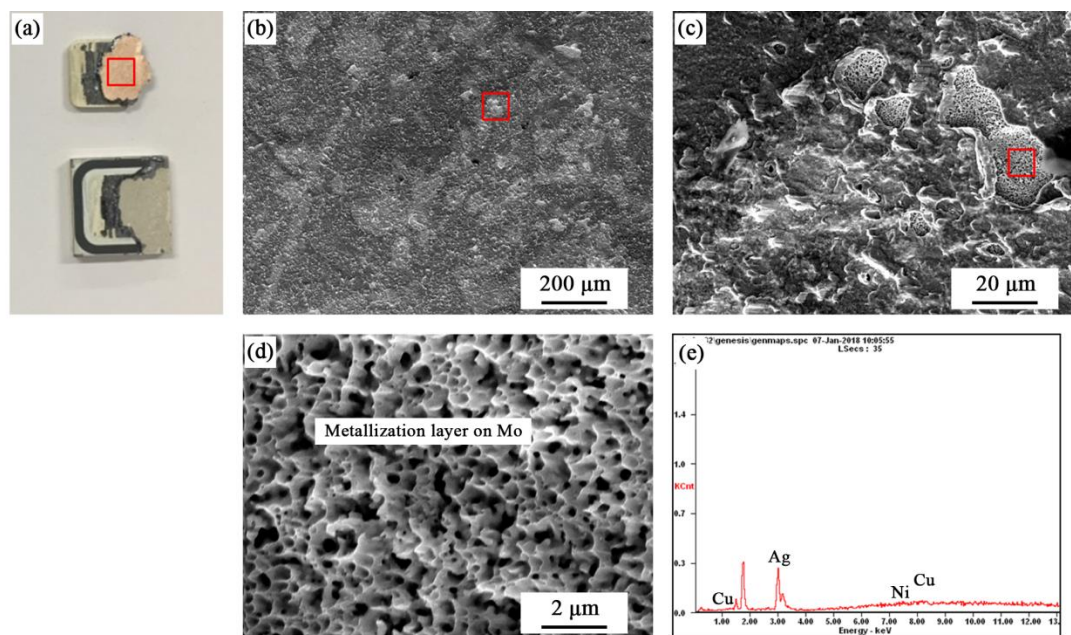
Fracture morphology of sintered package under 30 MPa, (a) optical image of fracture surface; (b), (c) and (d) are the gradually partial magnified image of (a); (e) EDS pattern of the fracture surface
